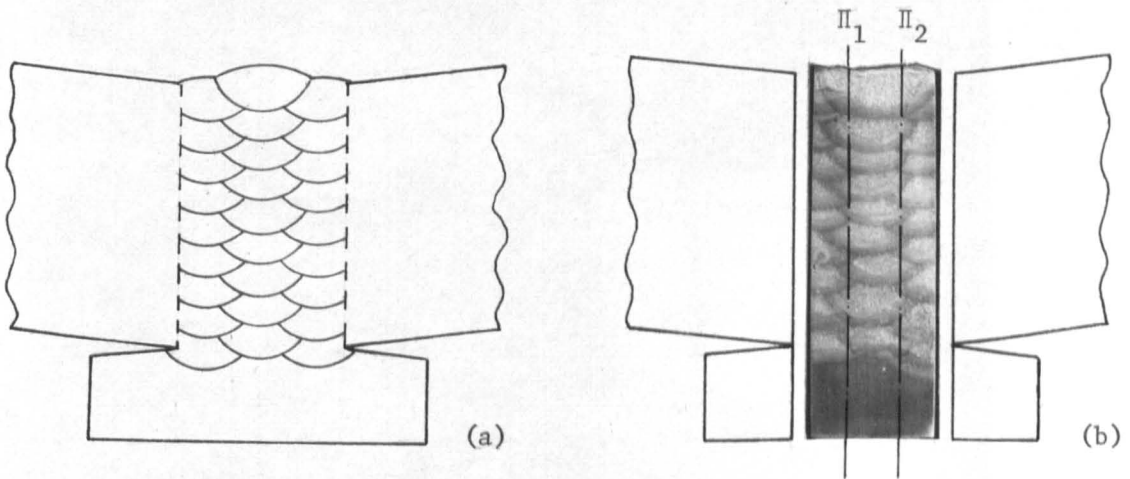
Weld preparation used for the continuous water cooling test.
